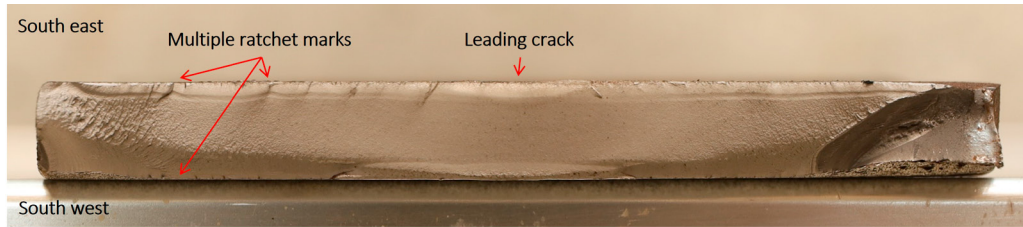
Macroscopic fracture surface features, specimen TA690-4.
